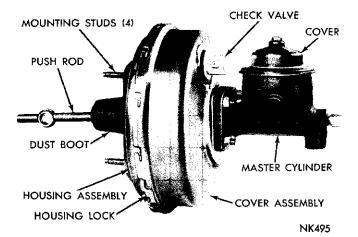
Power Brake and Master Cylinder (Kelsey Hayes)
